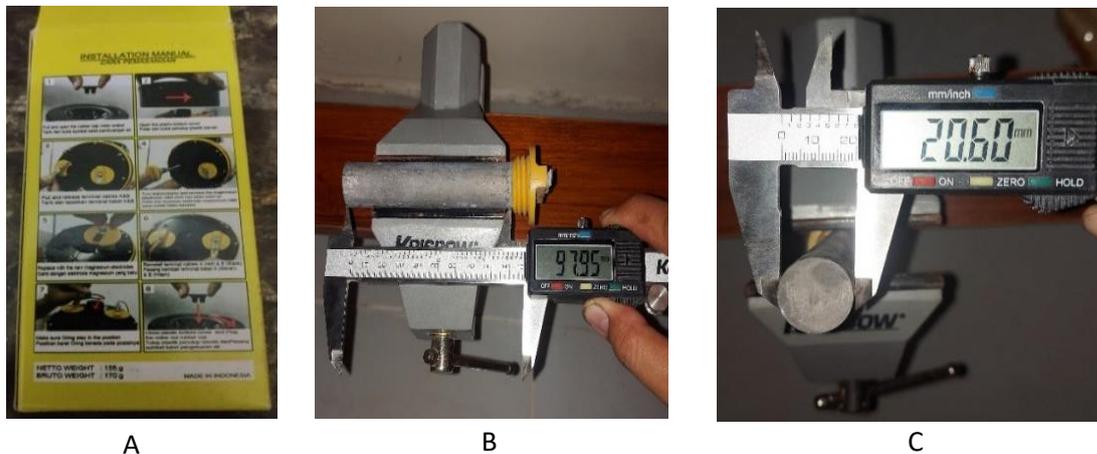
Product packaging and specifications: a) product packaging; b) height; c) diameter
